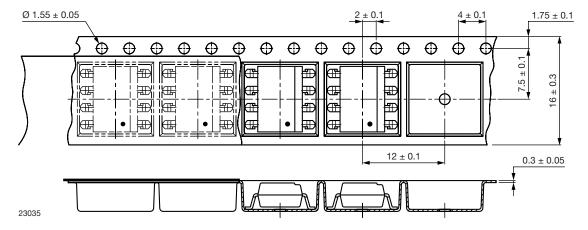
Tape and Reel Packaging (1000 pieces on reel)
